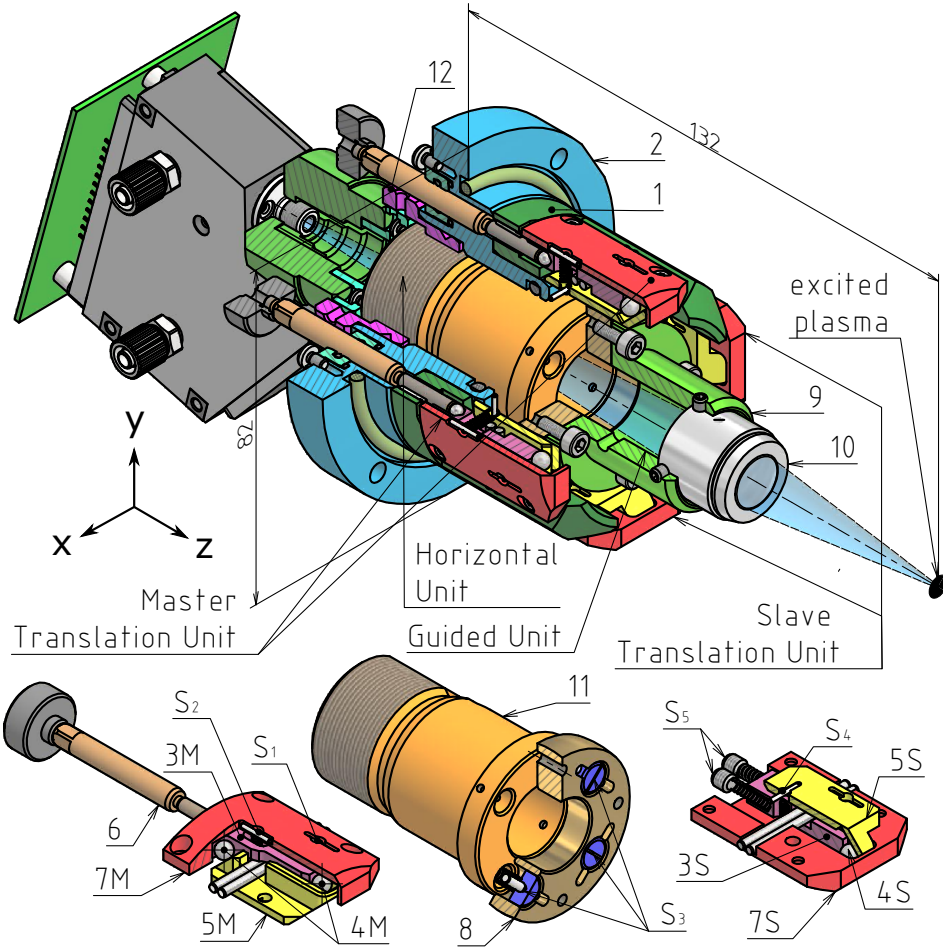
Visualization of the mechanism: 1 - Main Block; 2 - Flange; 3M/3S - Wedge Block of Master Translation Unit (MTU)/Slave Translation Unit (STU); 4M/4S - Bearing balls of MTU/STU; 5M/5S - Wedge of MTU/STU; 6 - Adjustment Screw; 8M/8S - Housing of MTU/STU; 9 - Lens Mounting; 10 - Lens; 11 - Shaft; 12 - Union Nut; S_1 , S_2 , S_3 , S_4 , S_5 - Springs.
